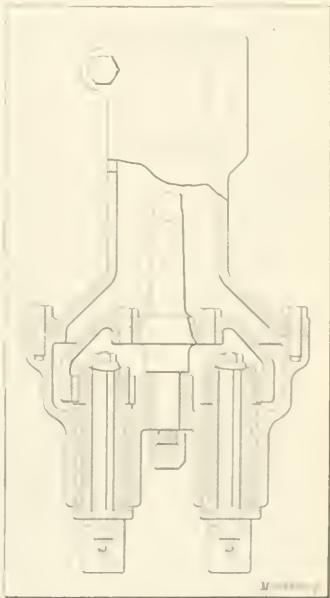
Cross-sectional View showing Arrangement of Internal Gear Drive
